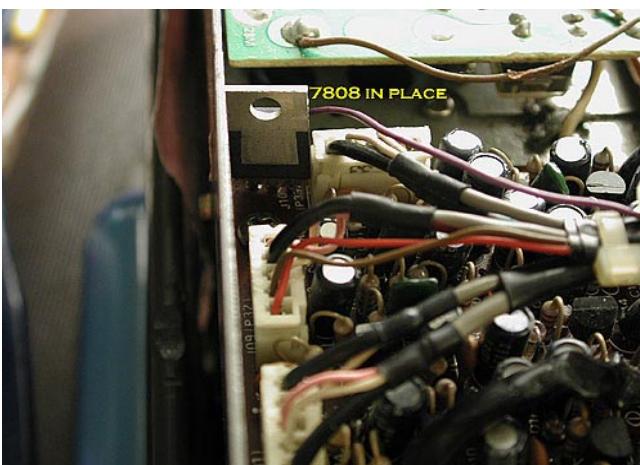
The regulator (7808) will be placed in the upper right hand corner of the AF Board.
